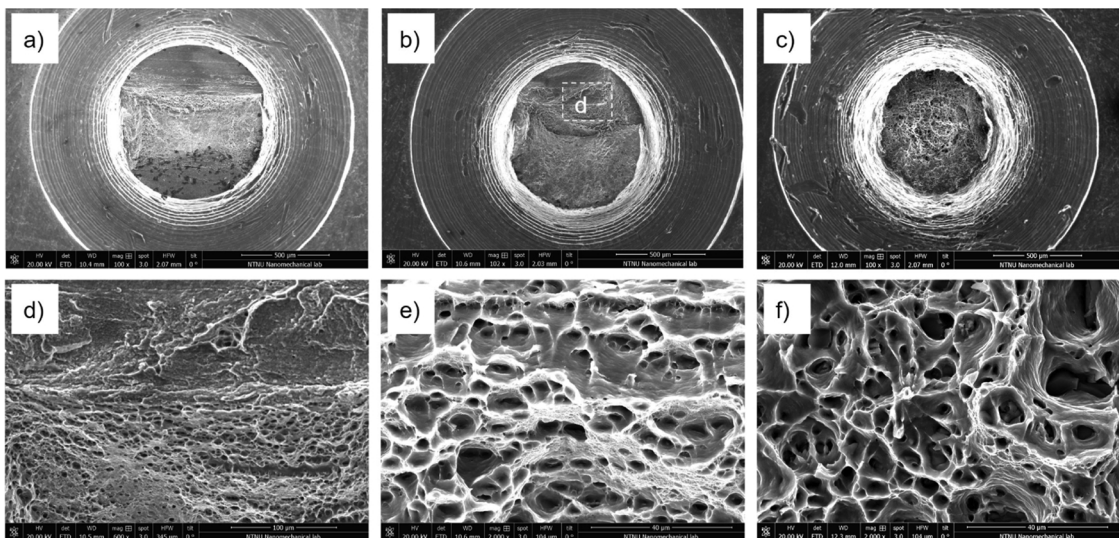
SEM fractographs of fracture surfaces from three broken specimens. The corresponding tensile test results are plotted in Fig. 10; (a) Fracture surface of specimen B3; (b) Fracture surface of specimen B4; (c) Fracture surface of substrate specimen S1; (d) Mixed region with kissing-bond and dimple formation in specimen B4; (e) Dimpled fracture surface observed in specimen B3, and; (f) Dimpled fracture surface observed in specimen S3.
